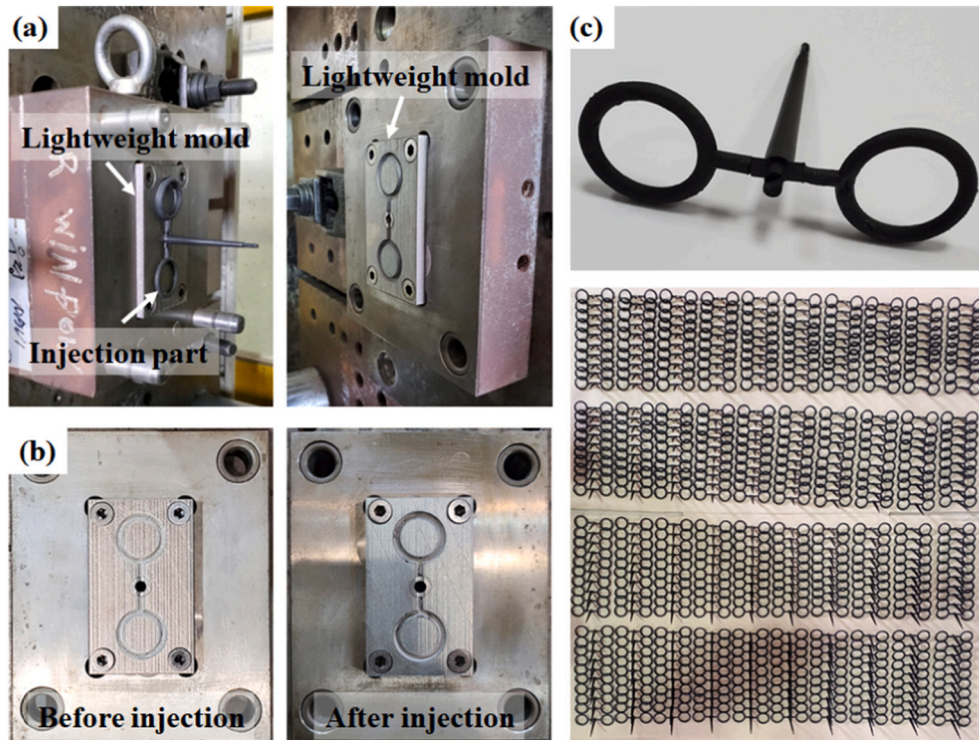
(a) Photographs of the equipment of lightweight molds and injection part in the injection molding system. (b) Lightweight molds for cavity before (left) and after (right) 400 shots injection molding. (c) Injection parts using the lightweight mold.
